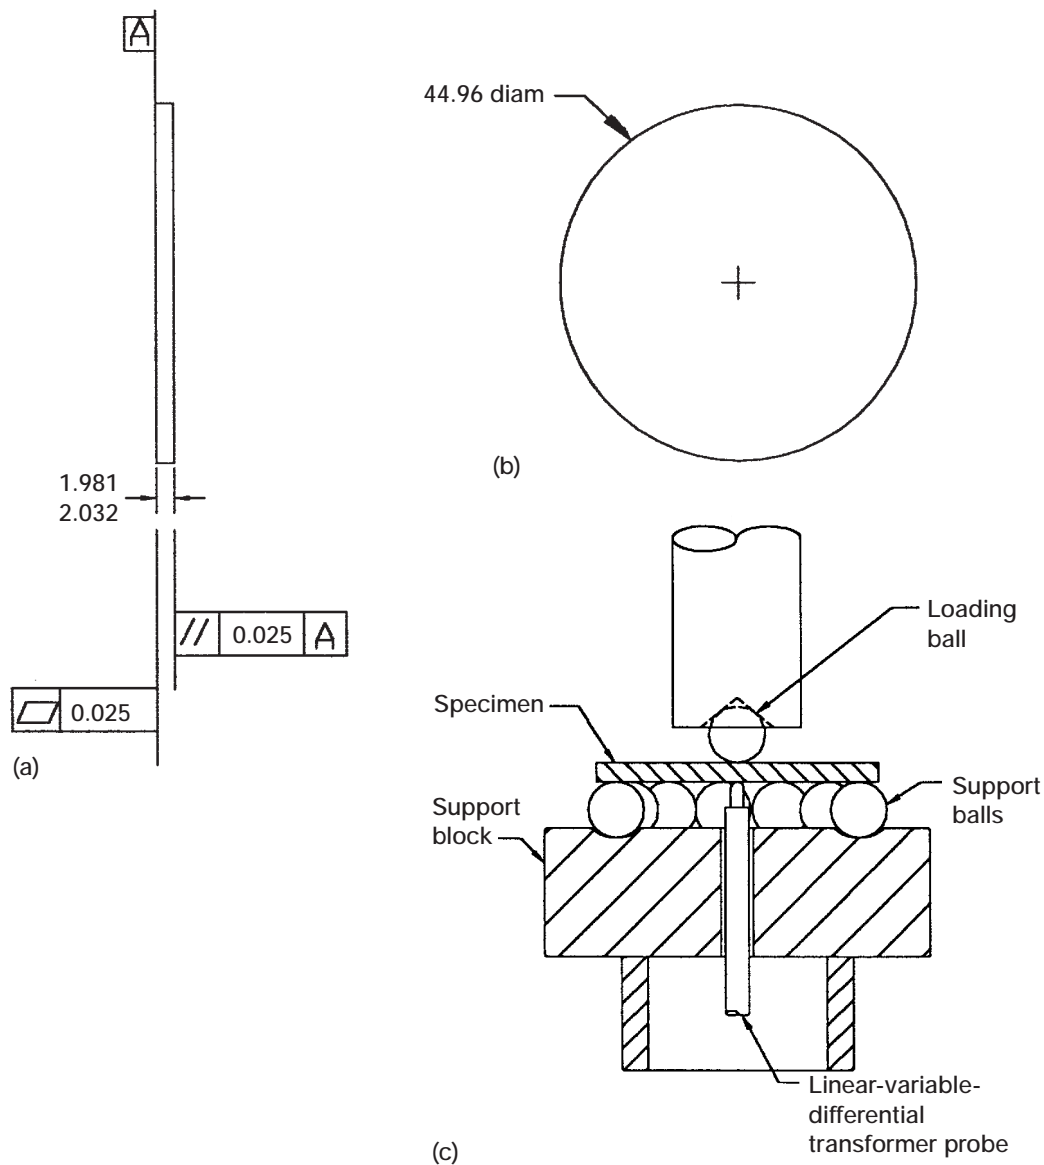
Ball-on-ring biaxial flexure creep testing. All dimensions given in millimeters.
